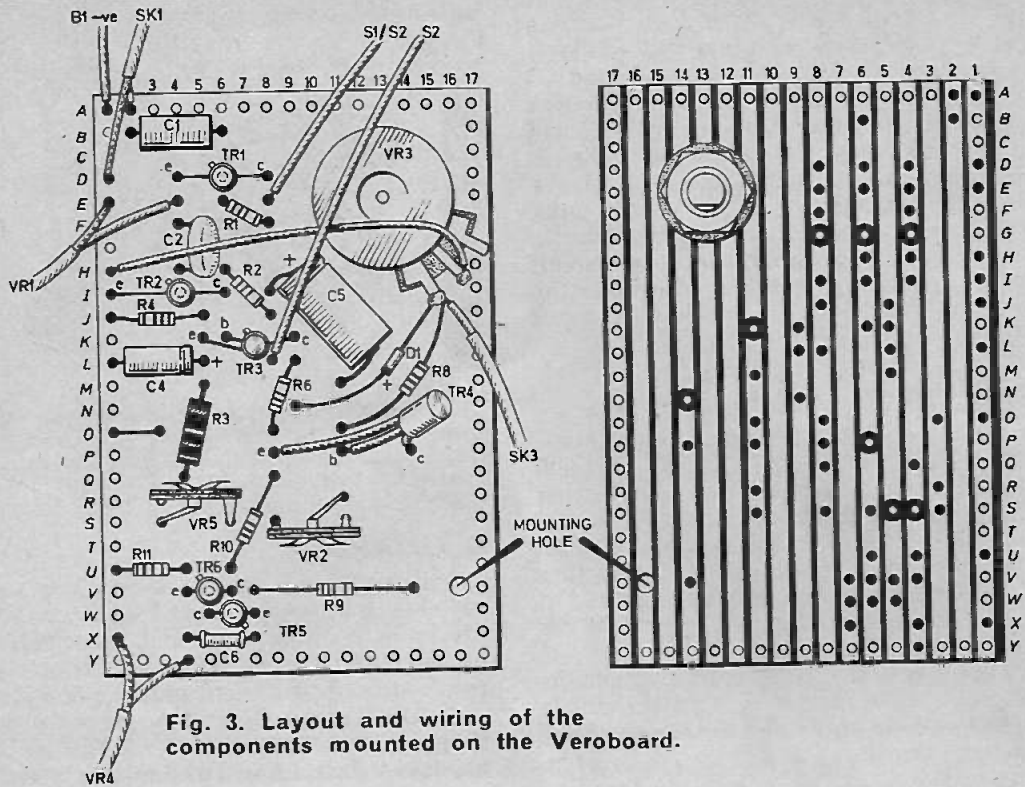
Layout and wiring of the components mounted on the Veroboard.
